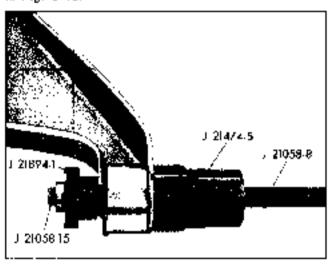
Removing Positive Lower Control Arm Front-Bushing or Tempesa Lower Control Arm Front Bushing
